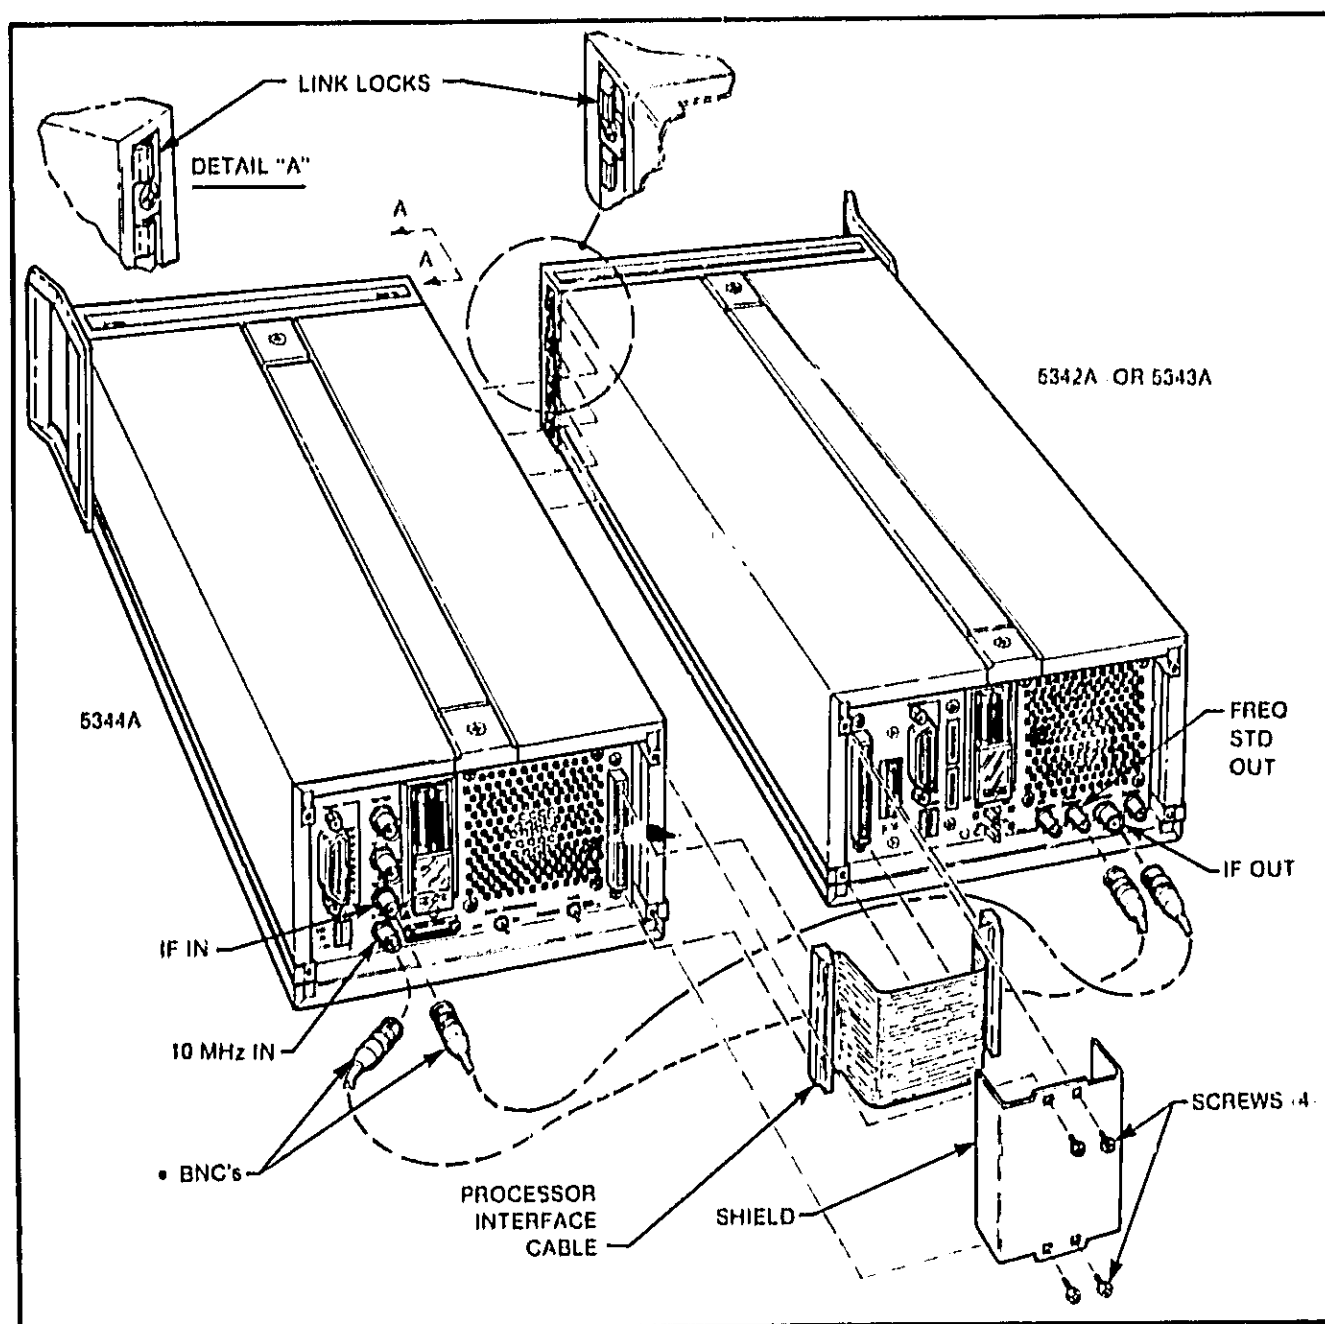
Connecting 5344A to the 5342A (or 5343A)
